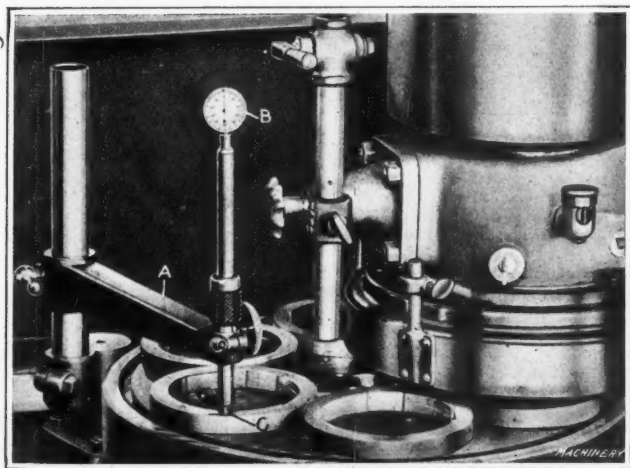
Continuous Reading Caliper for Use on Blanchard Vertical Surface Grinder
